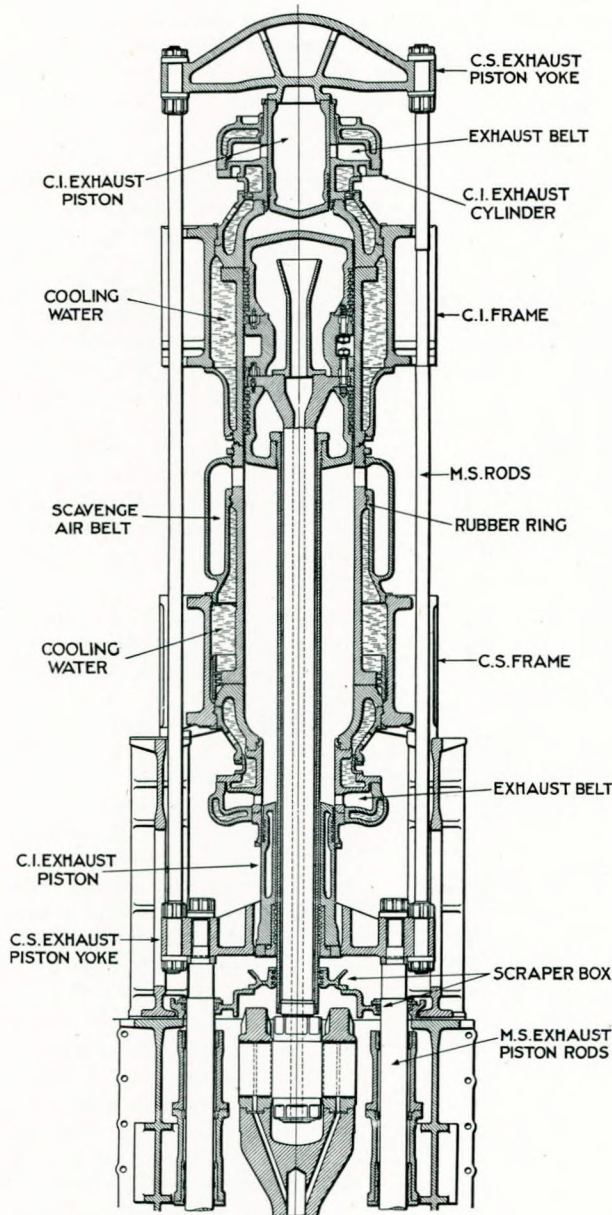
Fore and aft section of double-acting two-cycle engine.
